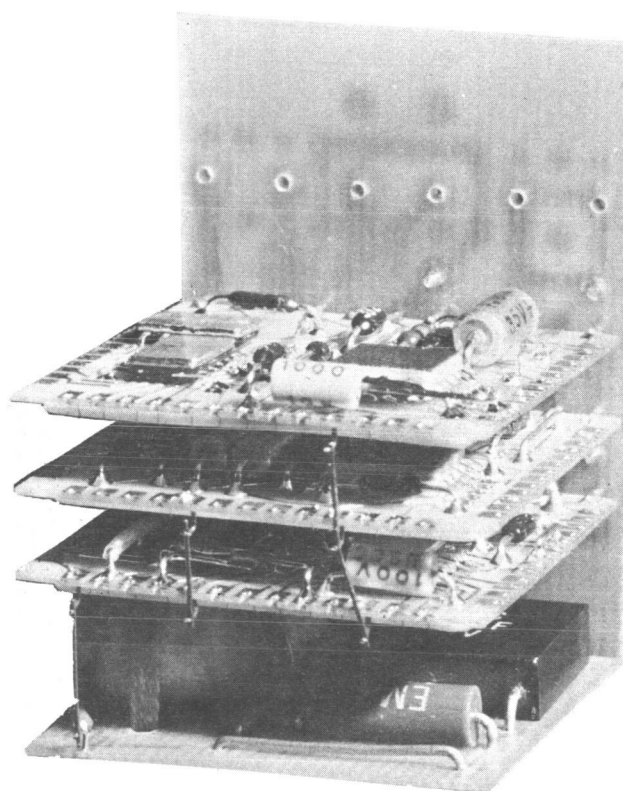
Hybrid Module Assembly Showing Three Interconnected Hybrid Circuits and Discrete Component Board
